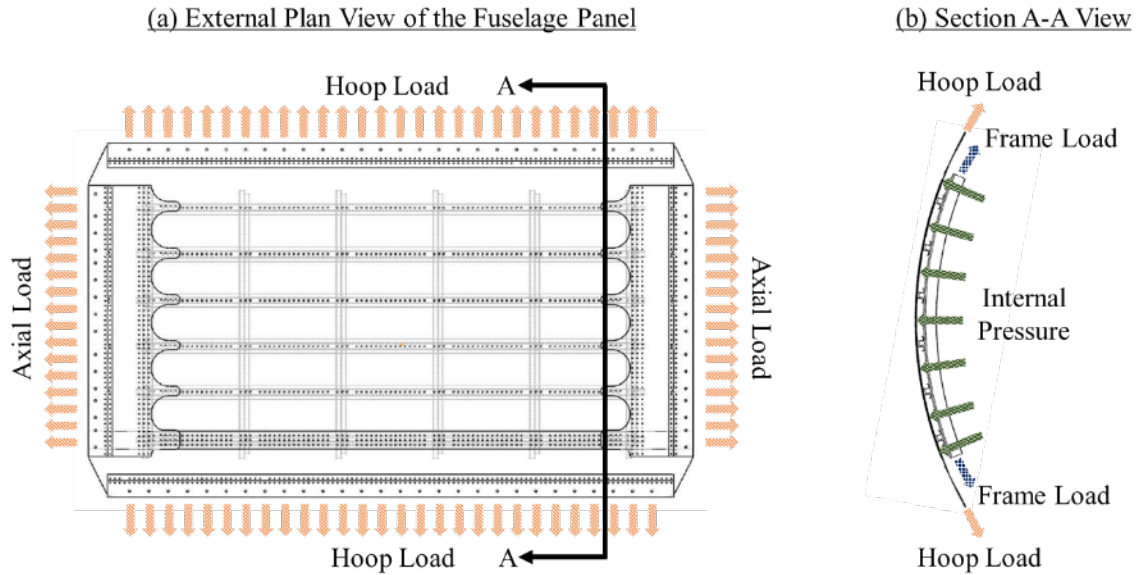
(a) External view of the fuselage panel and (b) section A-A view of the fuselage panel
